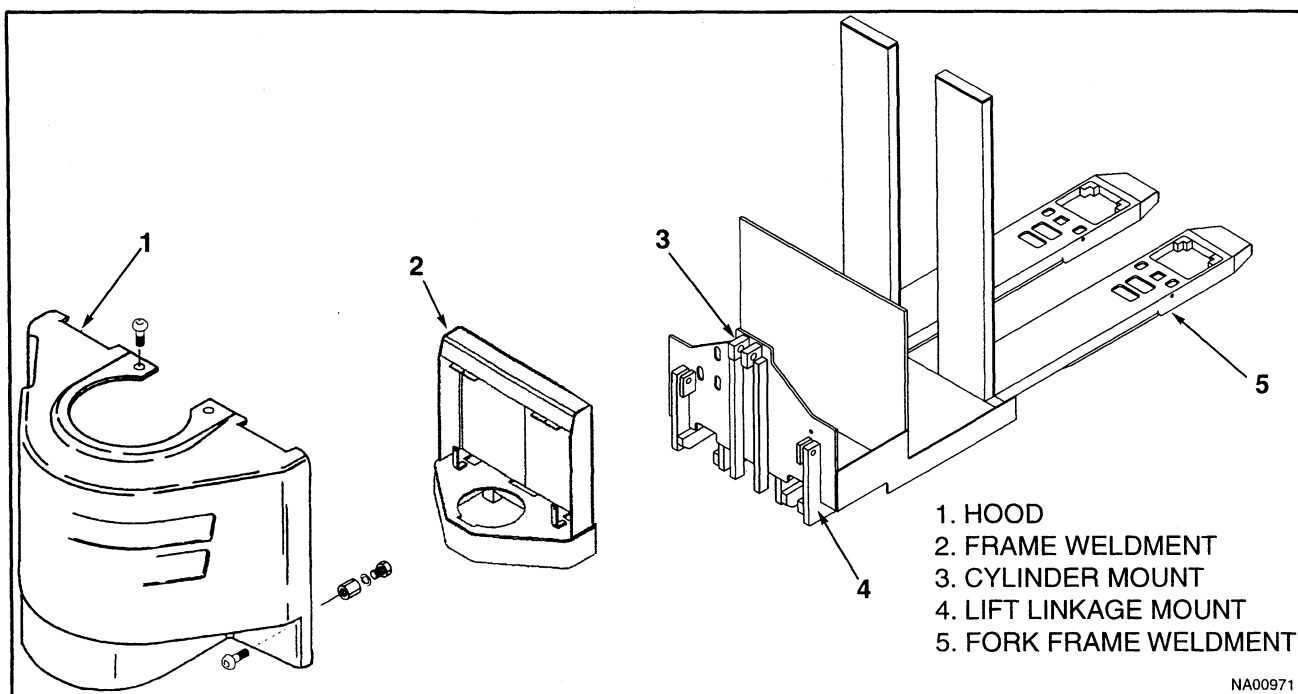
FRAME WELDMENT – C60-80XT2
